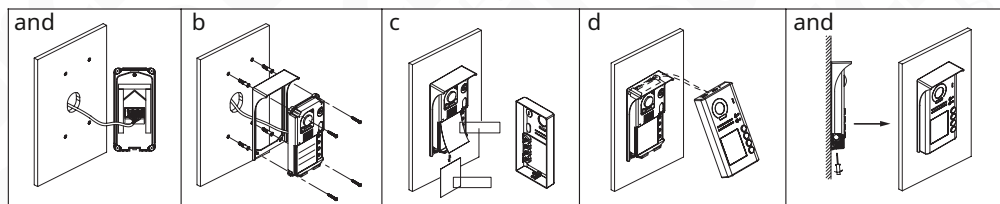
Installing the VDA-85A5 external cassette with a roof
